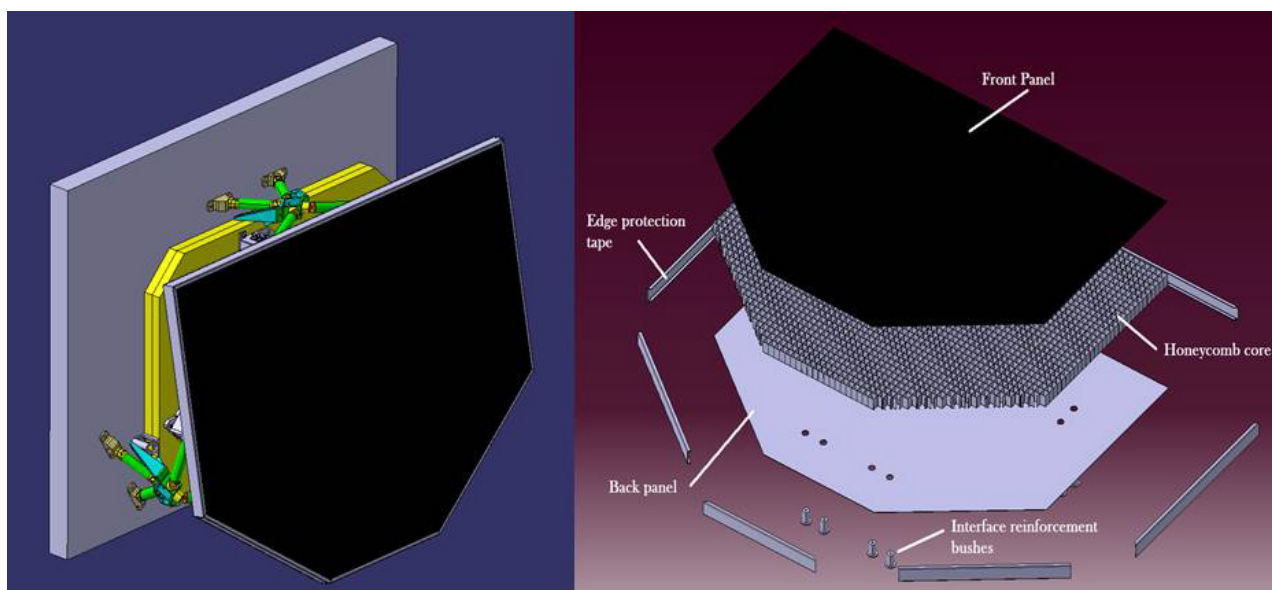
CAD view of: Cold Radiator on the IOB (left), sandwich structure (right)
